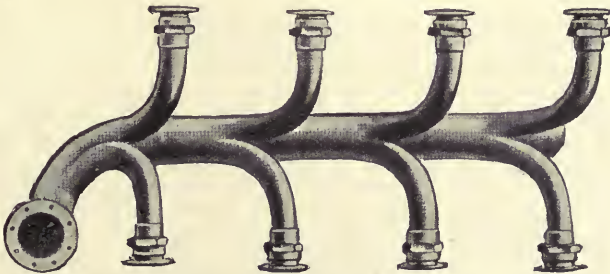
Arrangement of tubes for aviation motor, manufactured by autogenous welding.
